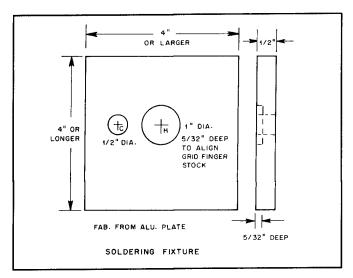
Dimensions of the soldering fixture. See Fig 3 for additional information on hole location.
